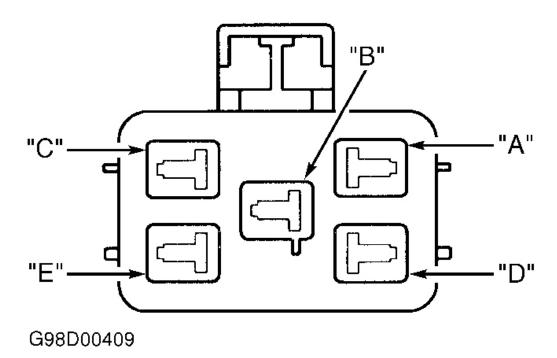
Identifying Wiper Motor Wiring Harness Connector Terminals Courtesy of GENERAL MOTORS CORP.
